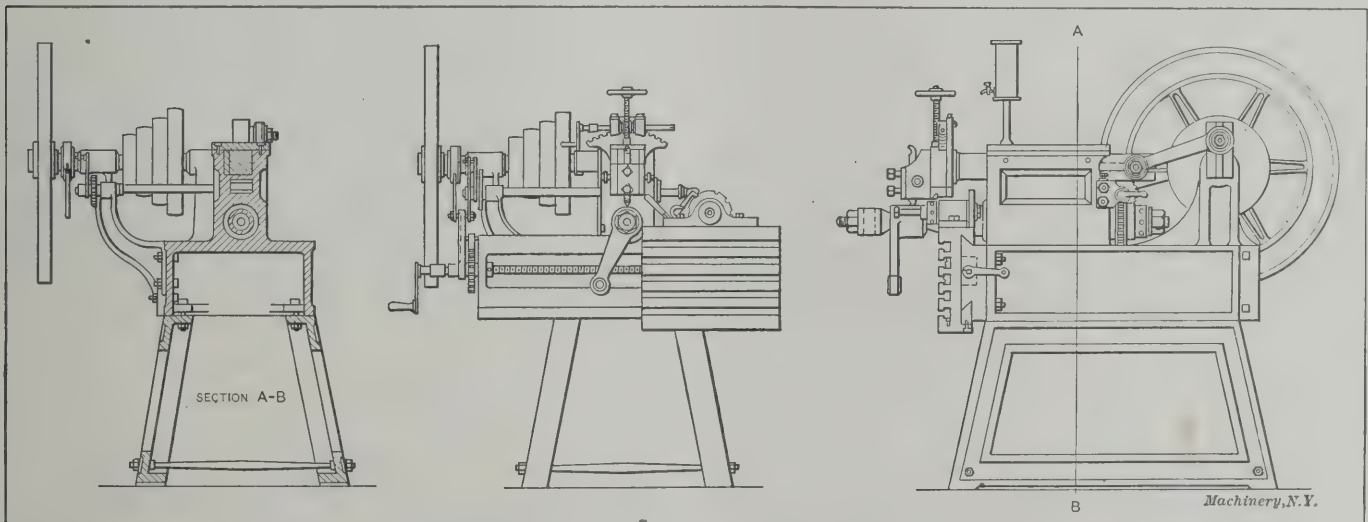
Compound Planing Machine or Shaper. Nasmyth & Gaskell
